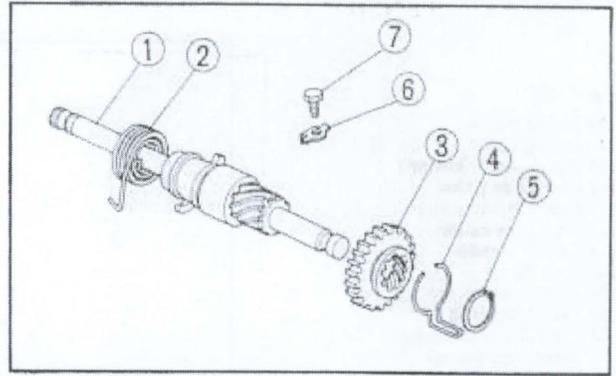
(1) Kick starter spindle (5) Snap ring (25mm)
